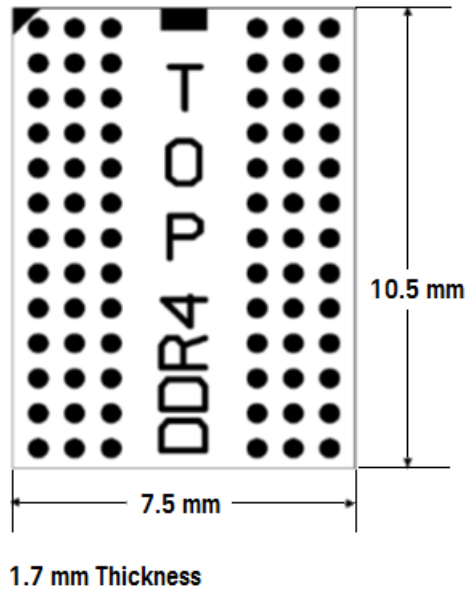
Dimensions of a W4643A interposer (TOP VIEW)
